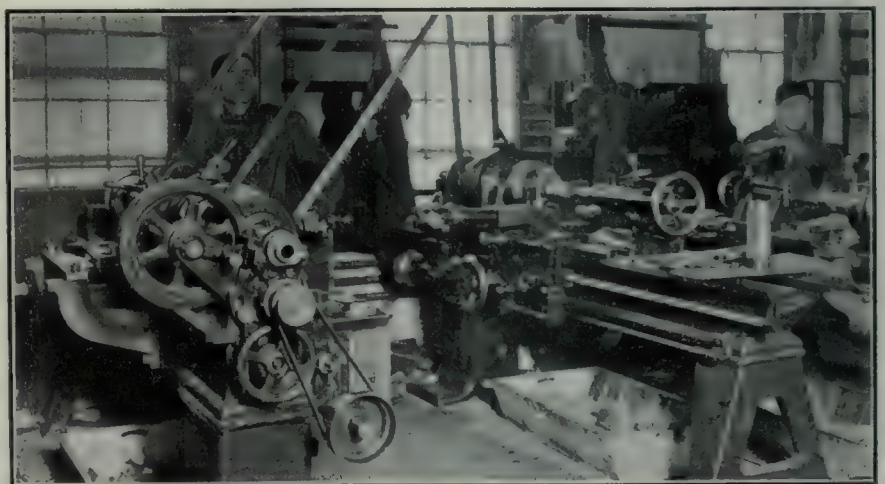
FINISH TURNING SHELLS ON ENGINE LATHES. ONE MAN RUNNING TWO MACHINES.
